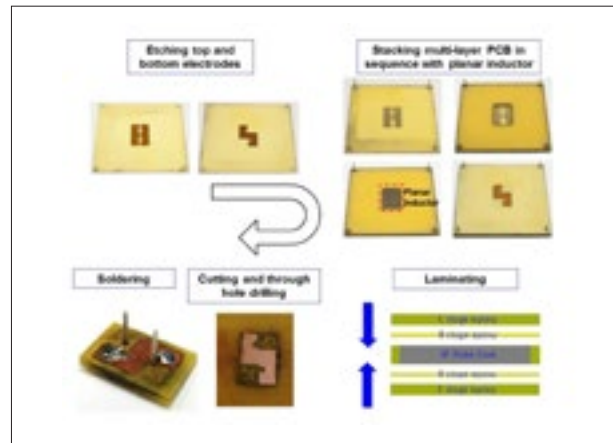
Fabrication process of PCB-embedded planar inductor.
